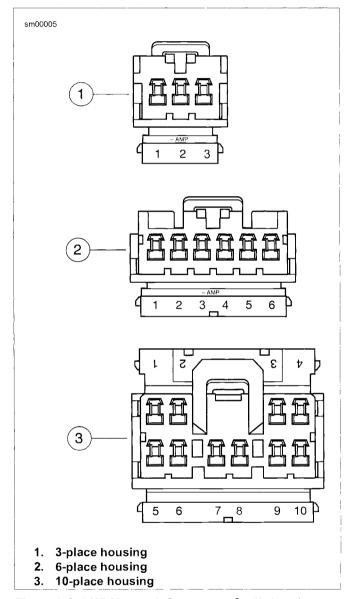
AMP Multilock Connector: Cavity Numbers on Secondary Locks (Socket Housings Shown)
